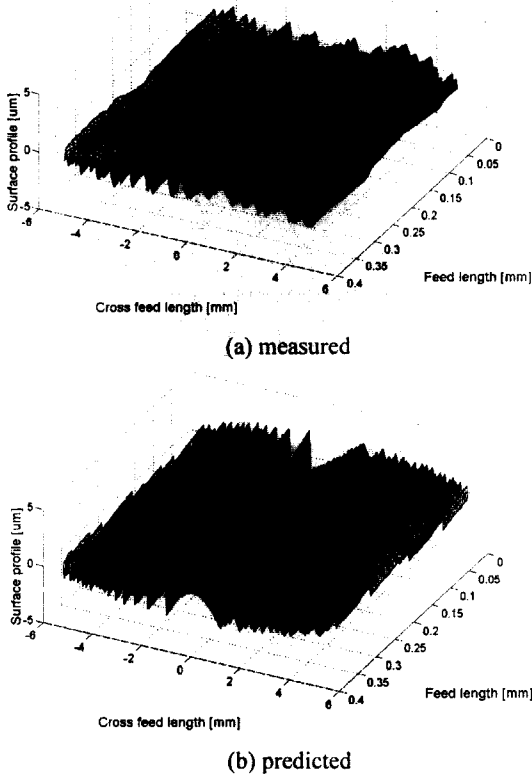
Three dimensional surface profile (depth: 0.3mm)
